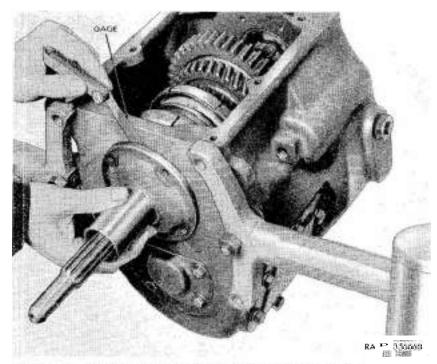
Checking clearance between input shaft bearing retainer and case with thickness gage.
